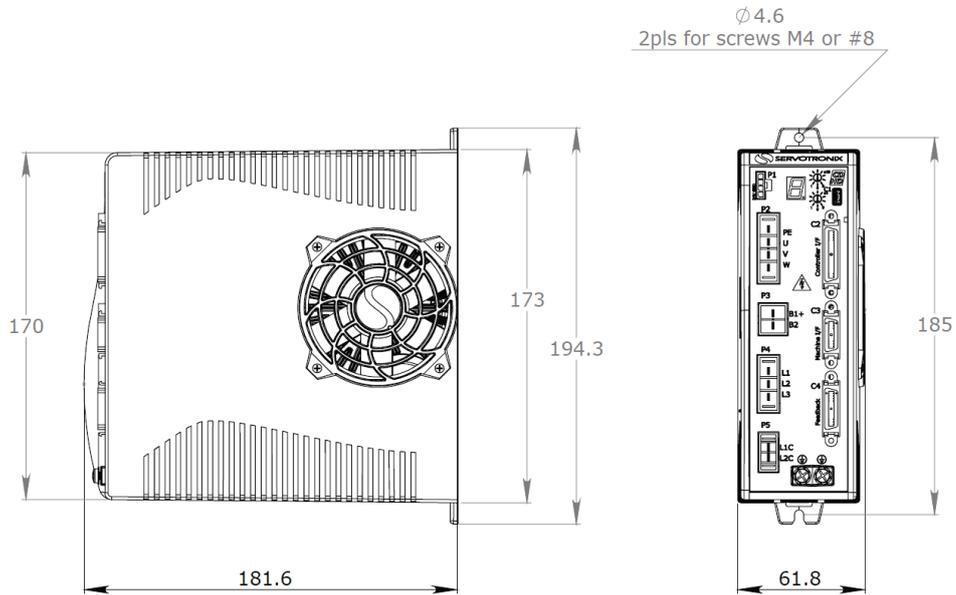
FLEXI PRO-1D5/FLEXI PRO-003 – 120/240 VAC – Dimensions (mm)
